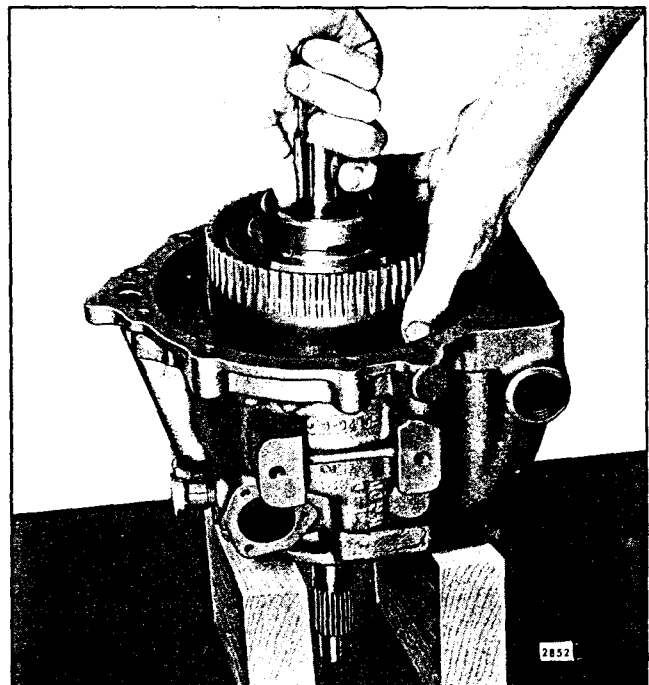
Removing Drive Gear Input Shaft, Forward Clutch and Ring Gear Assembly from Reverse Gear Housing
